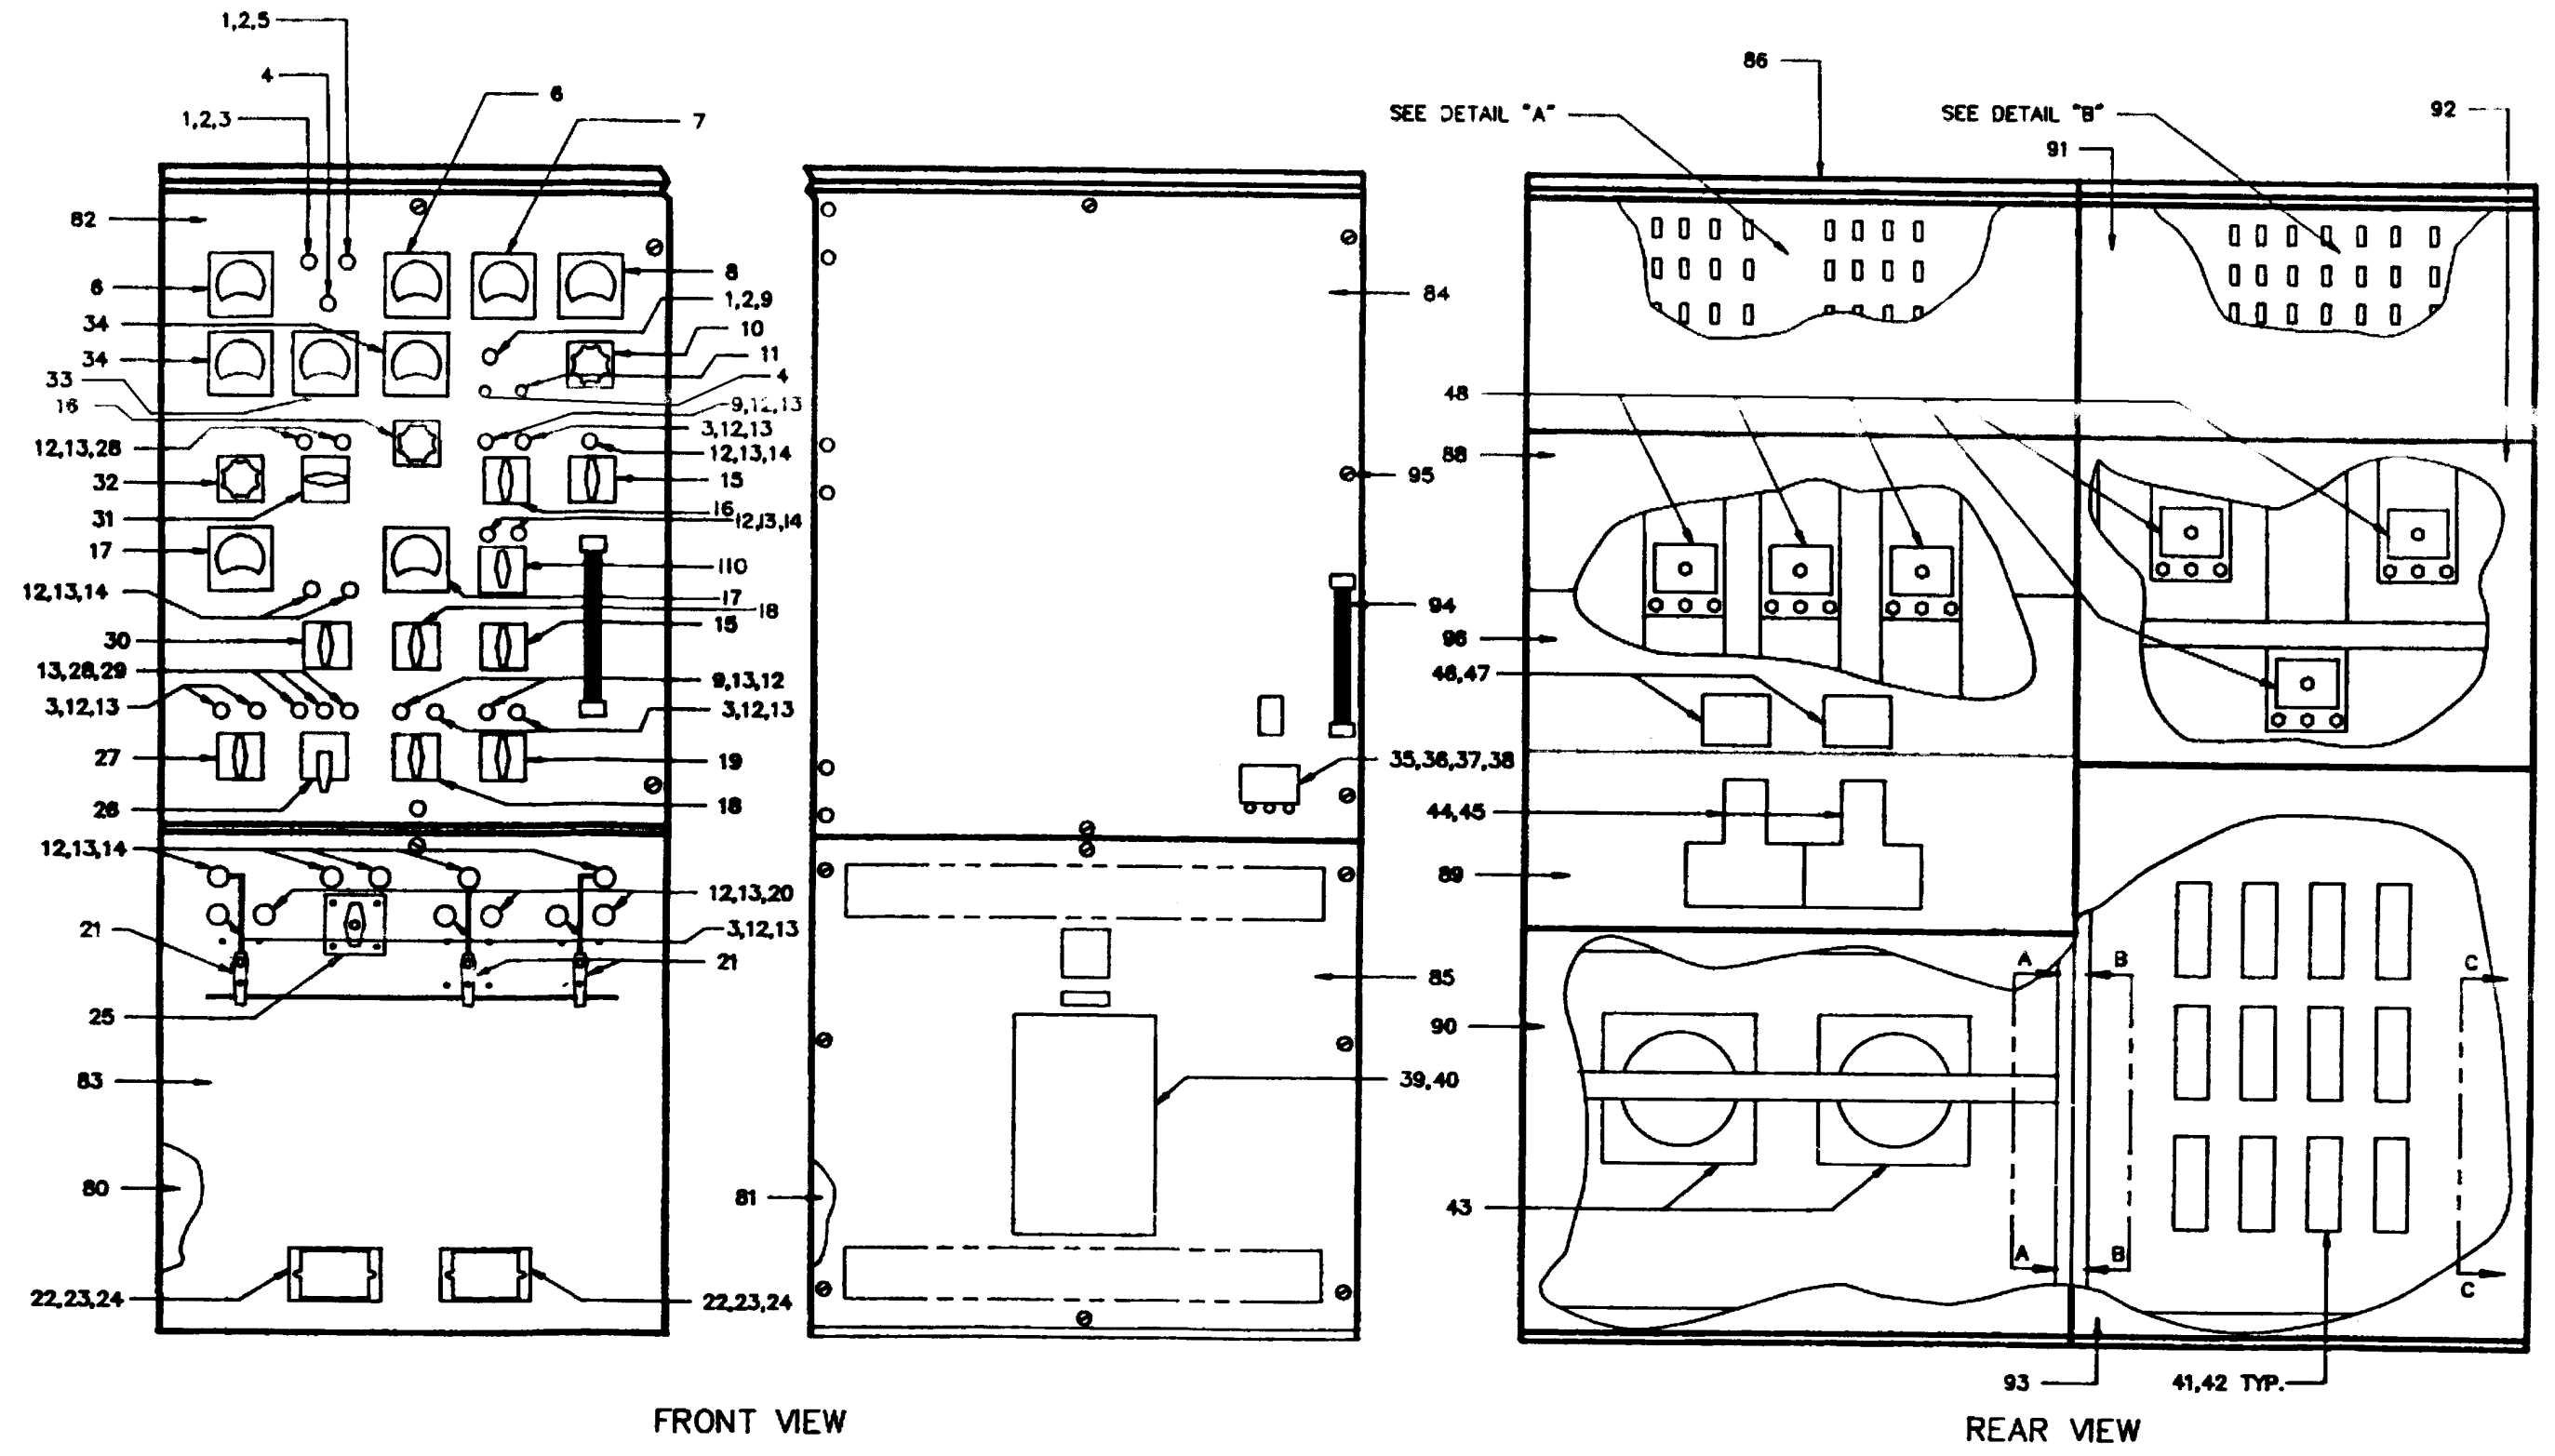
ISC Switchboard Assembly (Sheet 2 of 2)
